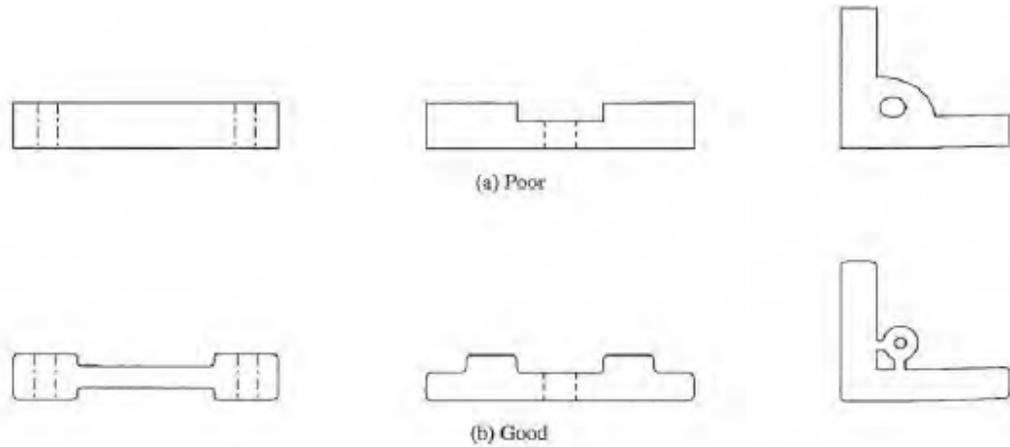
Elimination of sharp corners and redesign to make thicknesses more uniform in injection molded parts.
